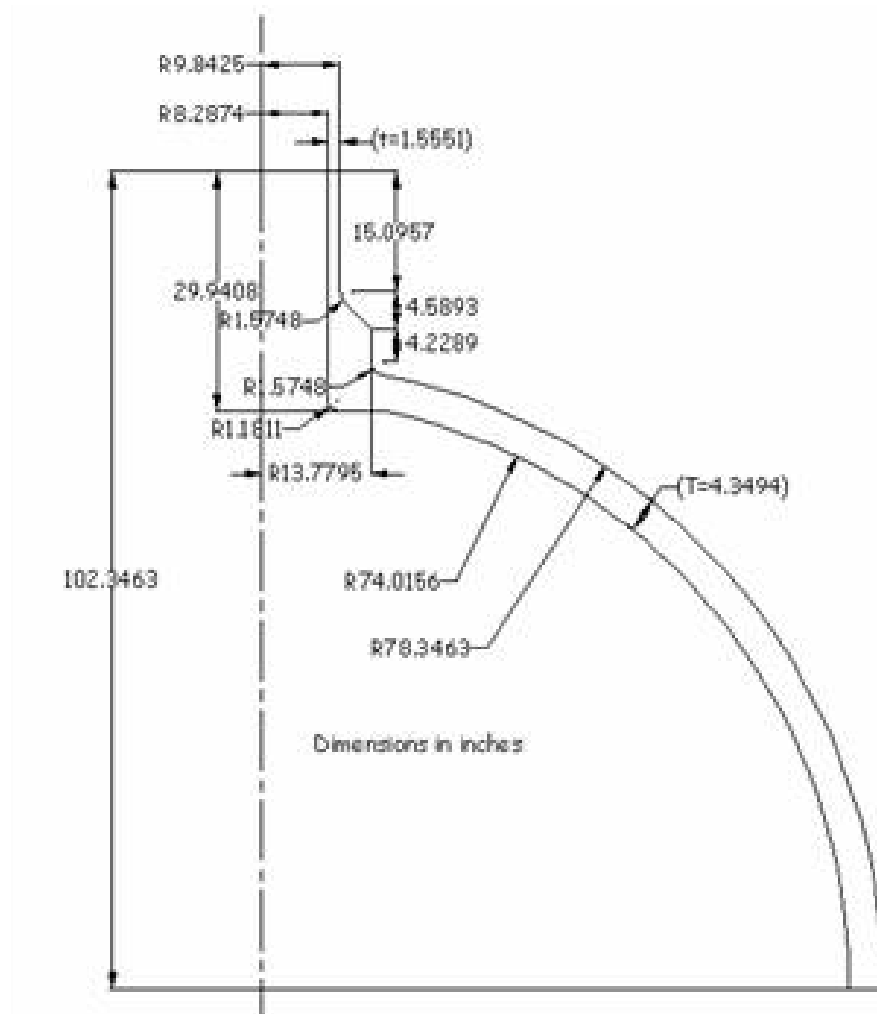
Dimensions (inches) and cross-section of sphere/nozzle and cylinder/nozzle intersection
